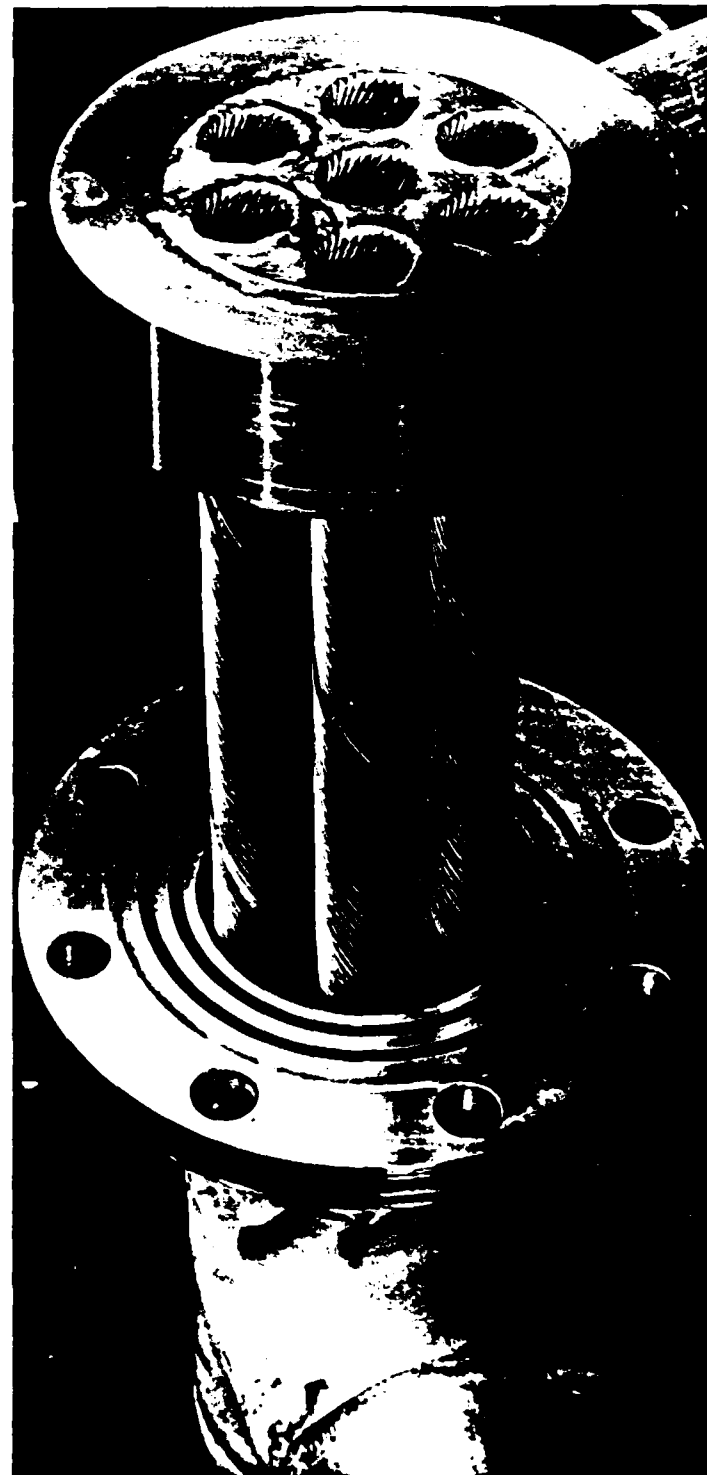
TUBE BUNDLE BEING ASSEMBLED
